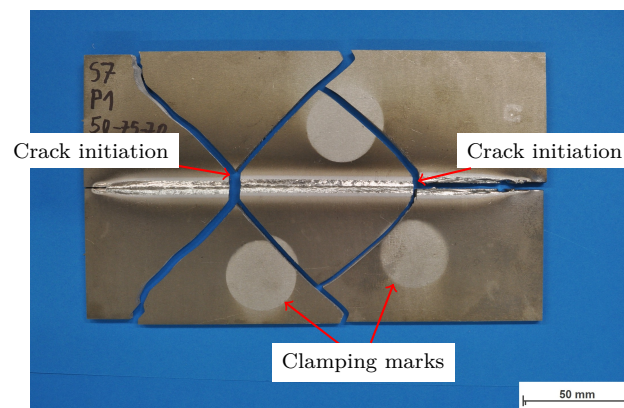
Cracked 5 mm TZM sample of a combined process after unclamping: Cracks initiated at the weld zone and propagated in 45° towards the sheet edges.
